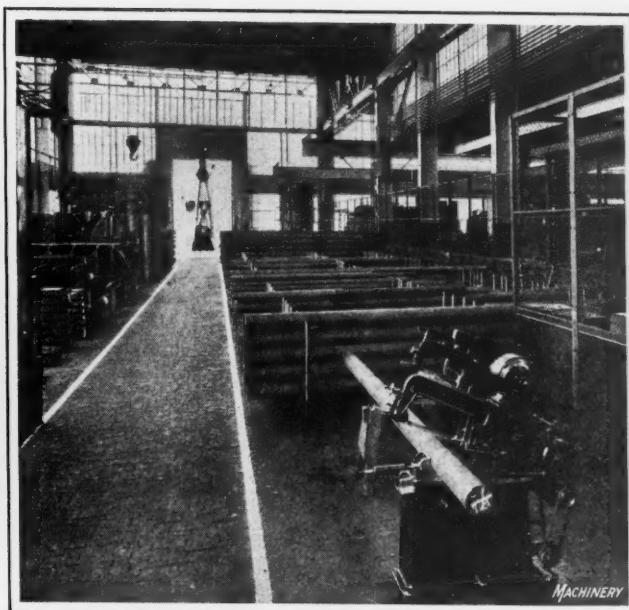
Transportation Facilities provided from Receiving Platform to Storage Space
